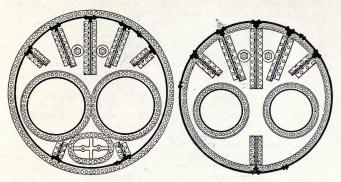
Section showing the front end-plate and gusset-stays of a Lancashire boiler.
